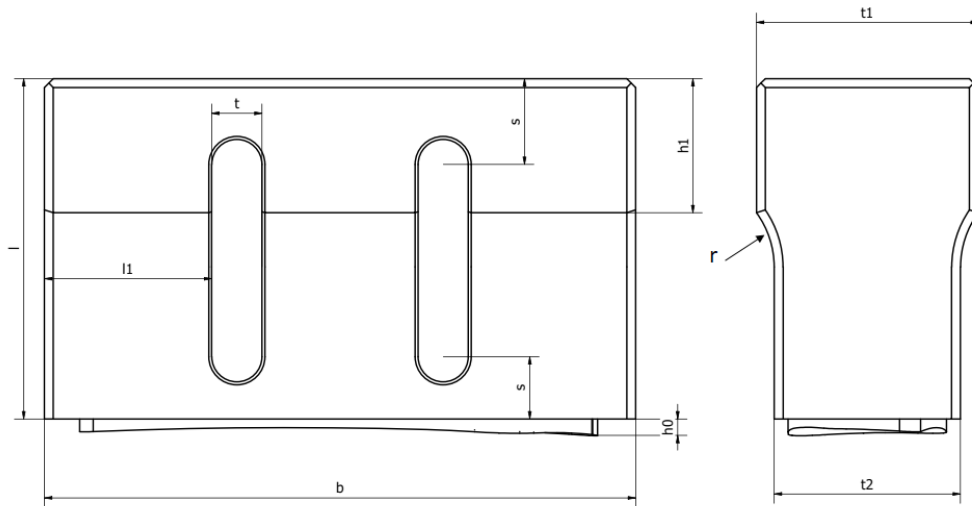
Basic dimensions of complex profile ultrasonic welding horn
